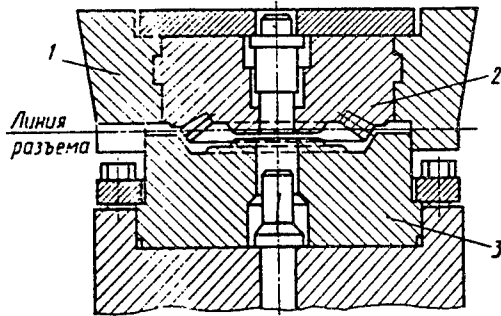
Operating Die Inserts for Hot Forging Crank Press
